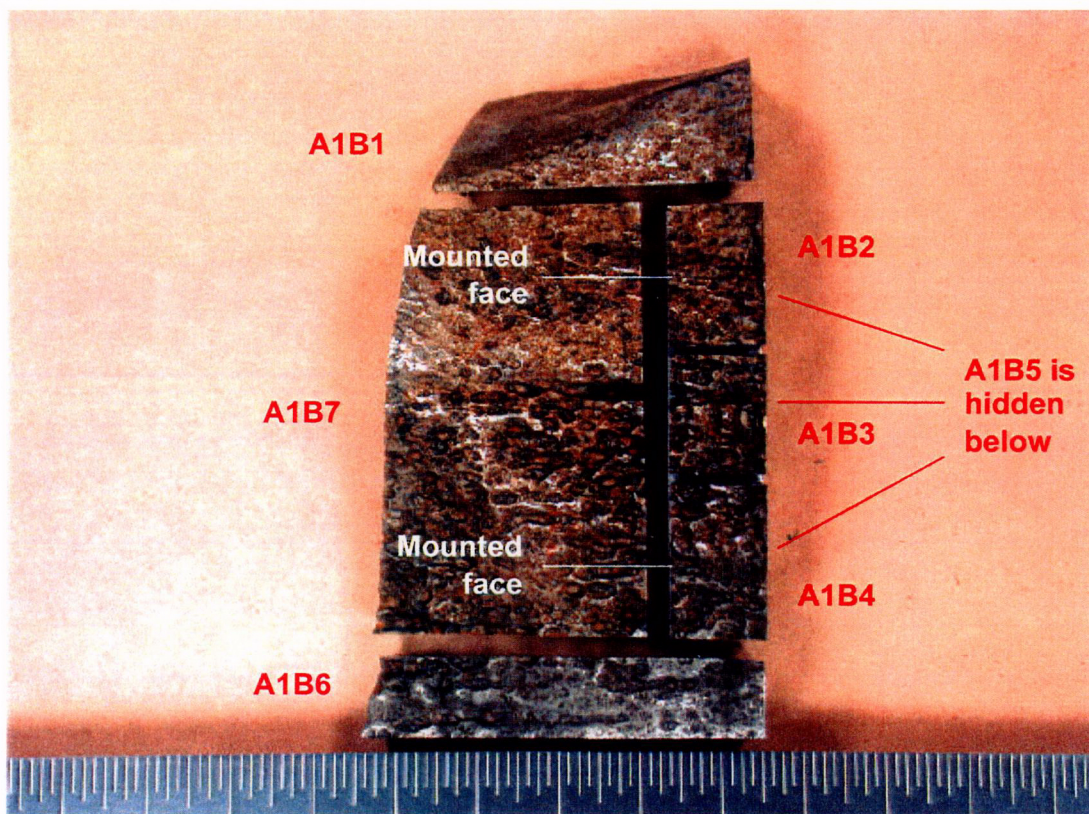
Section photo for Piece A1B, looking at the cavity side wall. The mounted surfaces of Piece A1B2 and Piece A1B4 is indicated.
